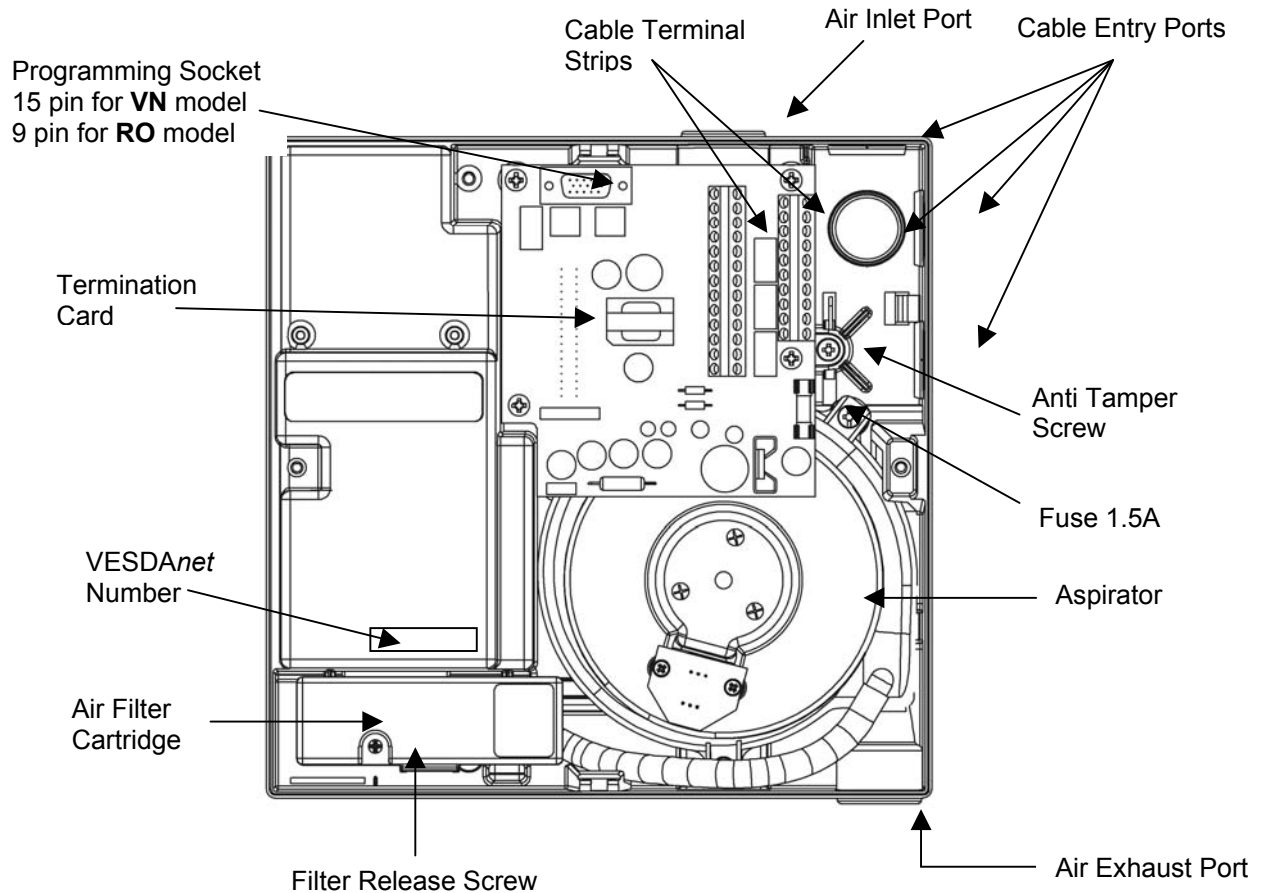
Location of Anti Tamper Screw and other Components inside the Enclosure
